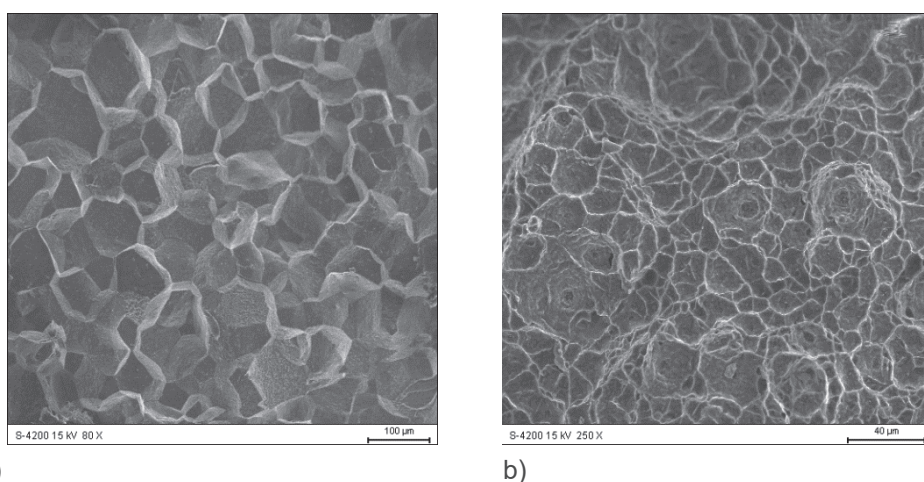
Fractography of sample fractures AZ80 alloy after tension of the samples at 480 °C (a) and 470 °C (b)
